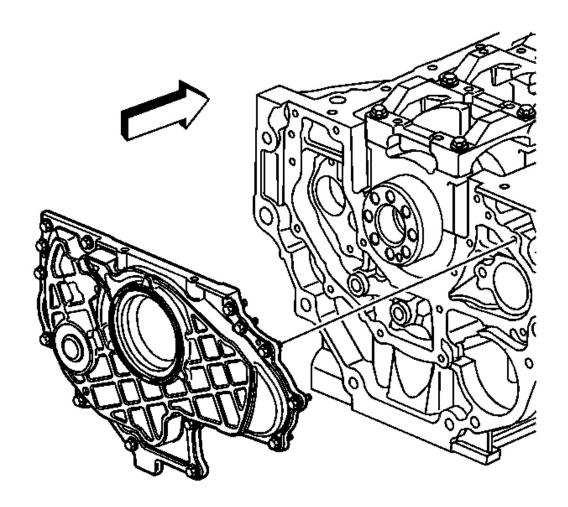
View Of Crankshaft Rear Oil Seal Housing Courtesy of GENERAL MOTORS CORP.
